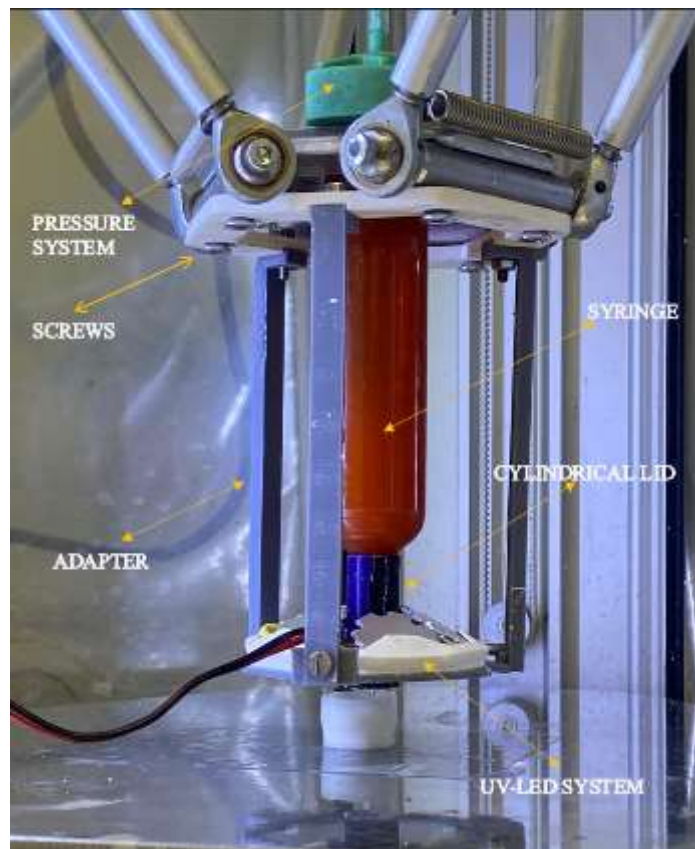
A schematic illustration of Hybrid UV-DIW components.
